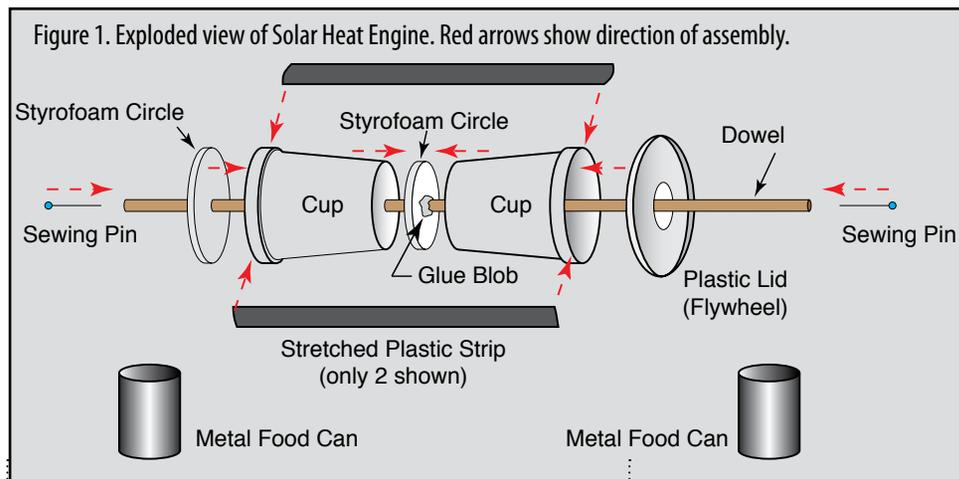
Exploded view of Solar Heat Engine. Red arrows show direction of assembly.
